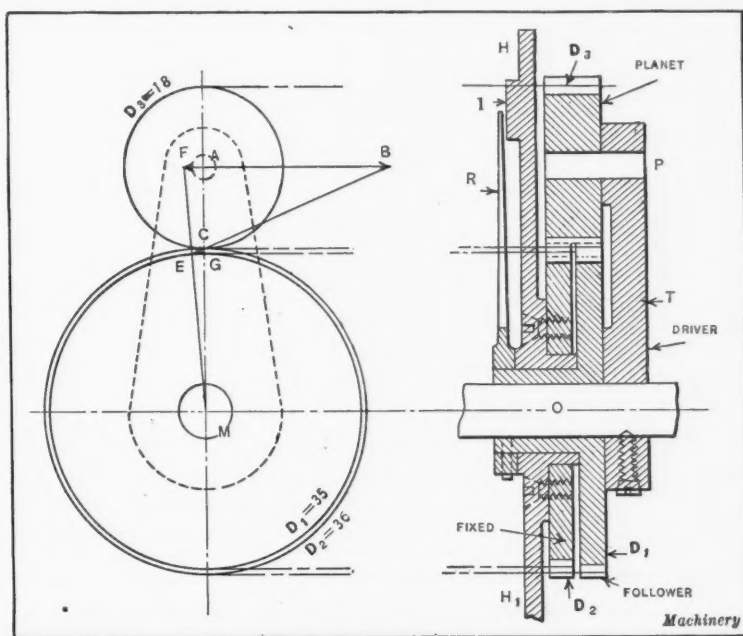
Planetary Mechanism having a Broad Planet Wheel which engages Both Fixed and Follower Gears
